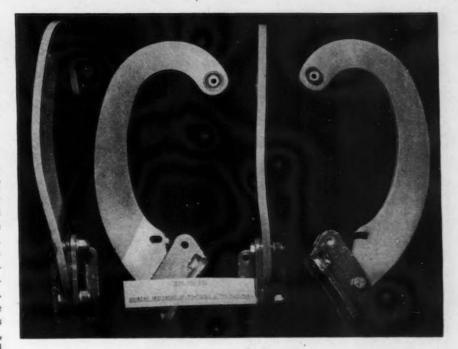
Hinge brackets consisting of a B195-T6 aluminum alloy casting for a base and aluminum alloy sheet for the arm to avoid casting a long flexible part.
